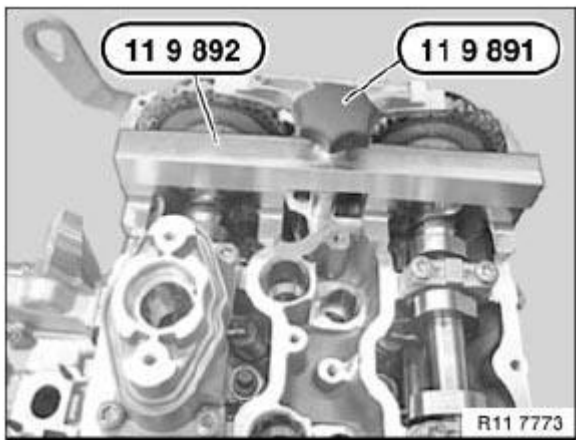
Identifying Special Tools (11 9 892 And 11 9 891)
